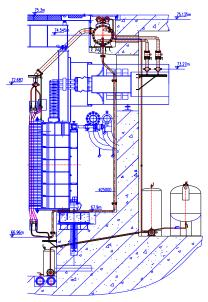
General engineering assembling drawing of 840MVA evaporative cooling hydro-generator of Three Gorges on Yangtze River
